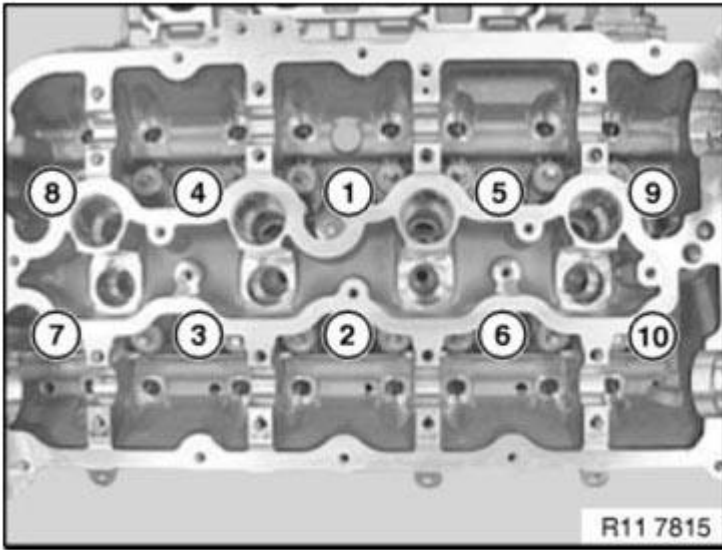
Identifying Cylinder Head Bolts Releasing Sequence
